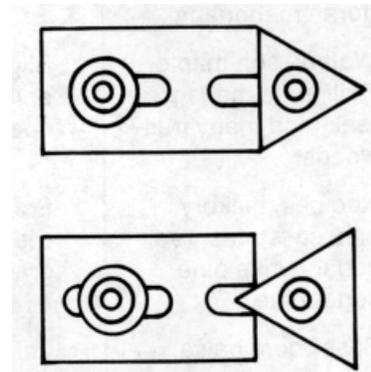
The triangle cutter can be mounted with the point or a flat side facing the workpiece.
